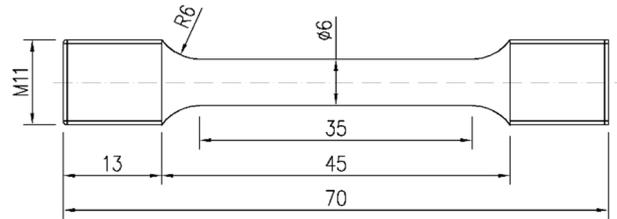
Specimen geometry for mechanical property tests -dimension in [mm].
